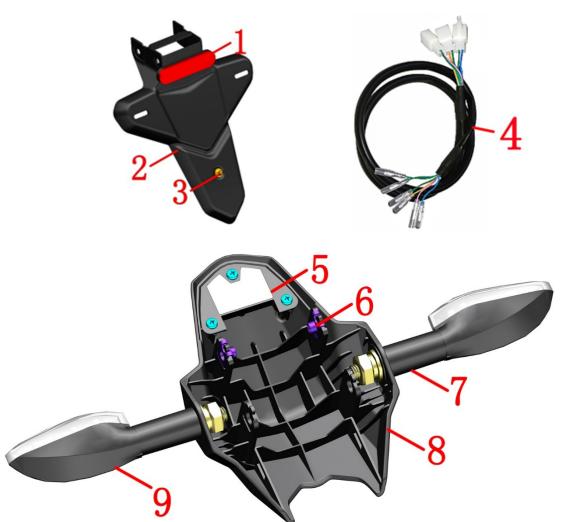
REAR COVER COMPONENT		Rear mud board component 2	СНК	40)
